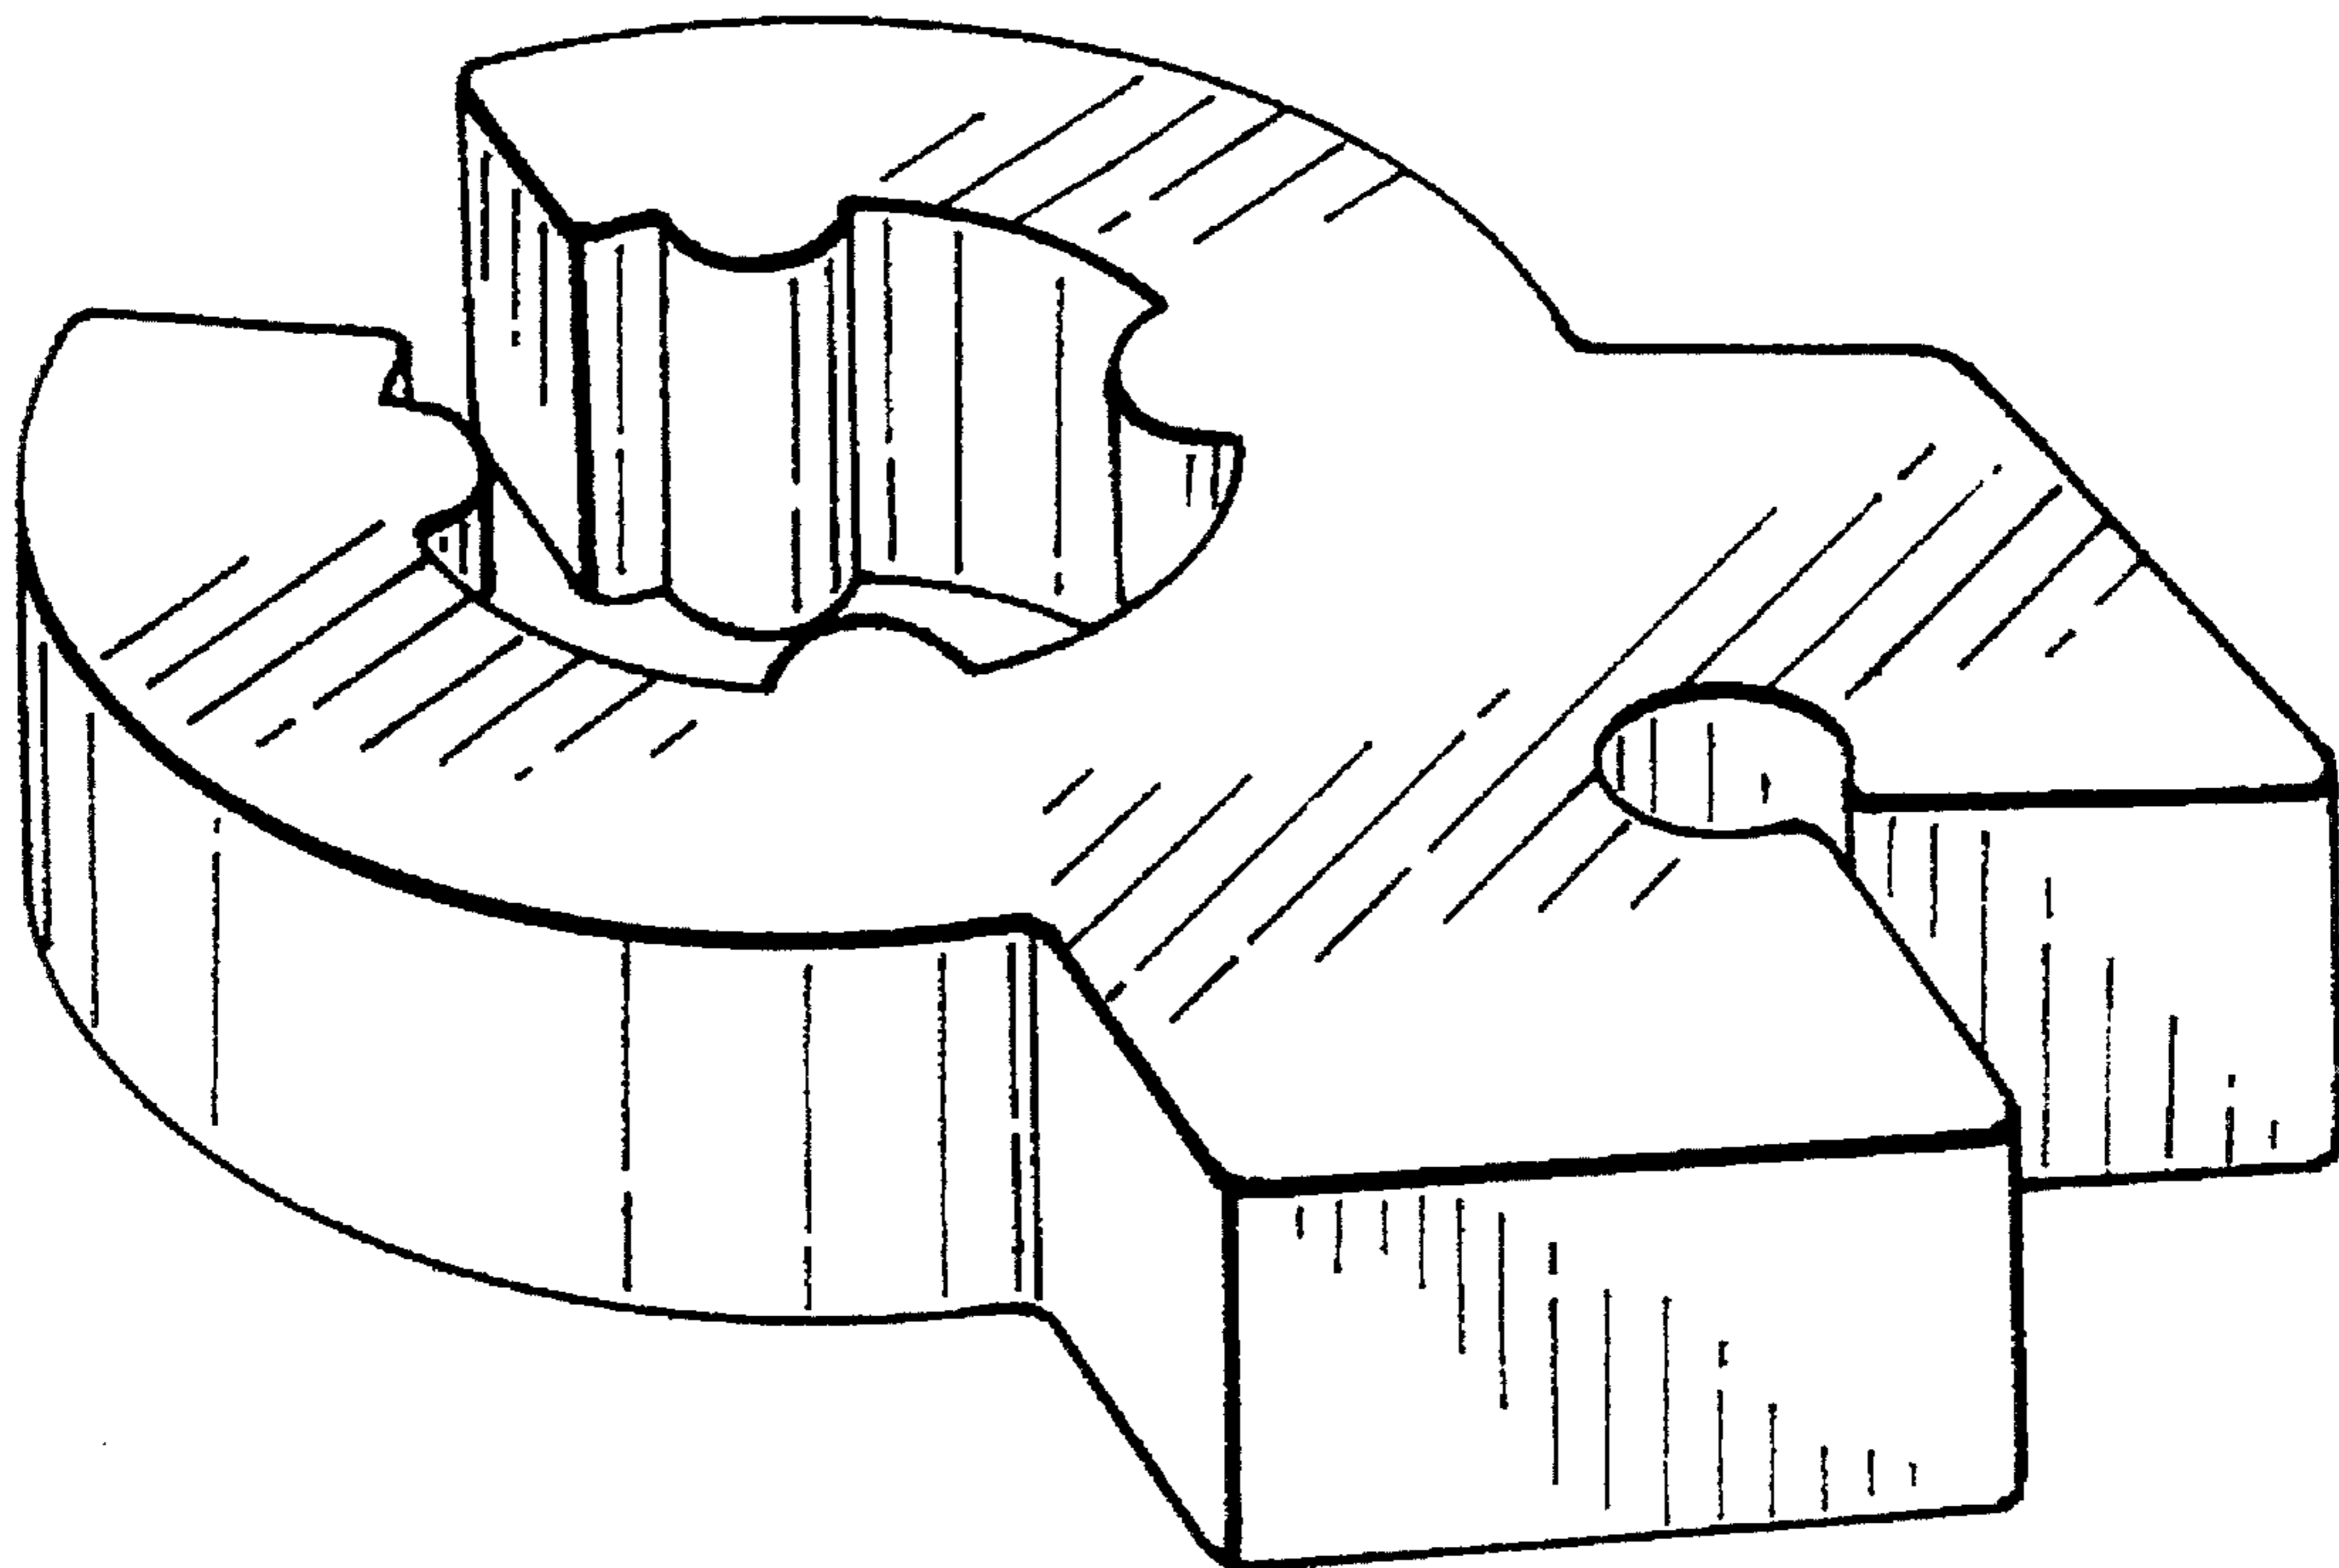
is a perspective view of the fishing rod connector showing the top and one side thereof;
